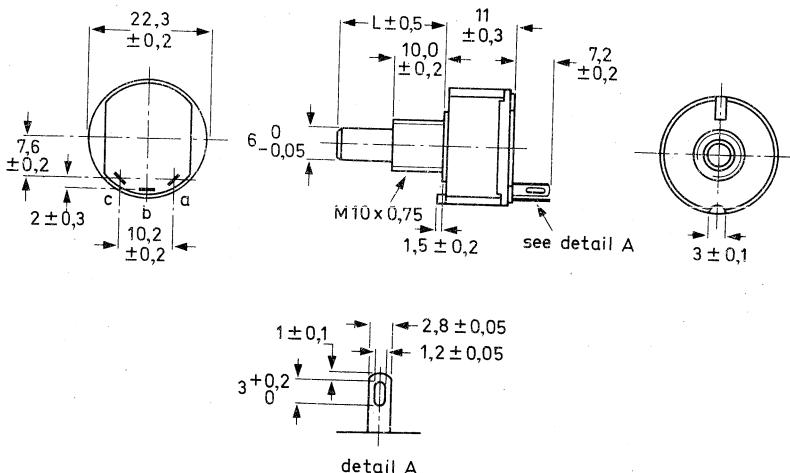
Potentiometer with plain spindle; spindle length L is 17 mm, 20 mm, 30 mm or 60 mm.
